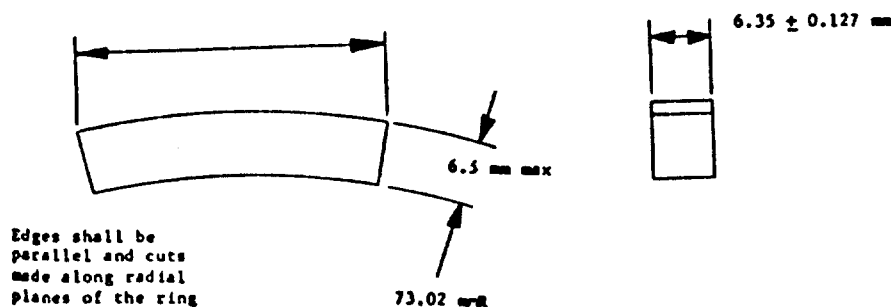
Horizontal Shear Test Specimen (Ring Specimen).
